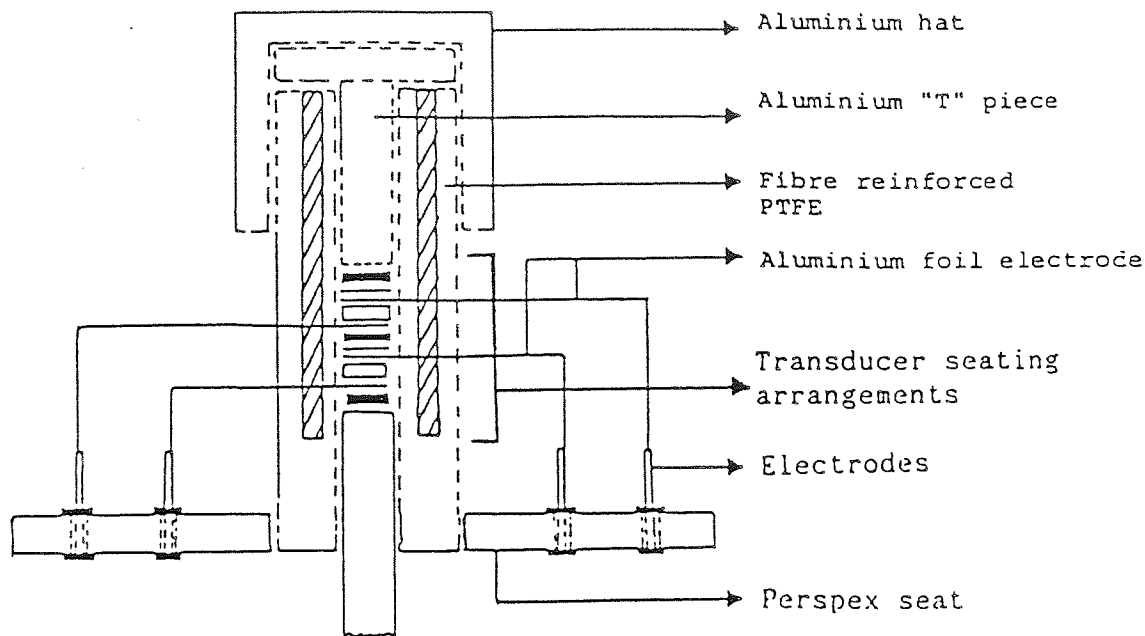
(a): Prototype 2; Construction of aluminium "T" piece and hat for a "screw" type fittings.
